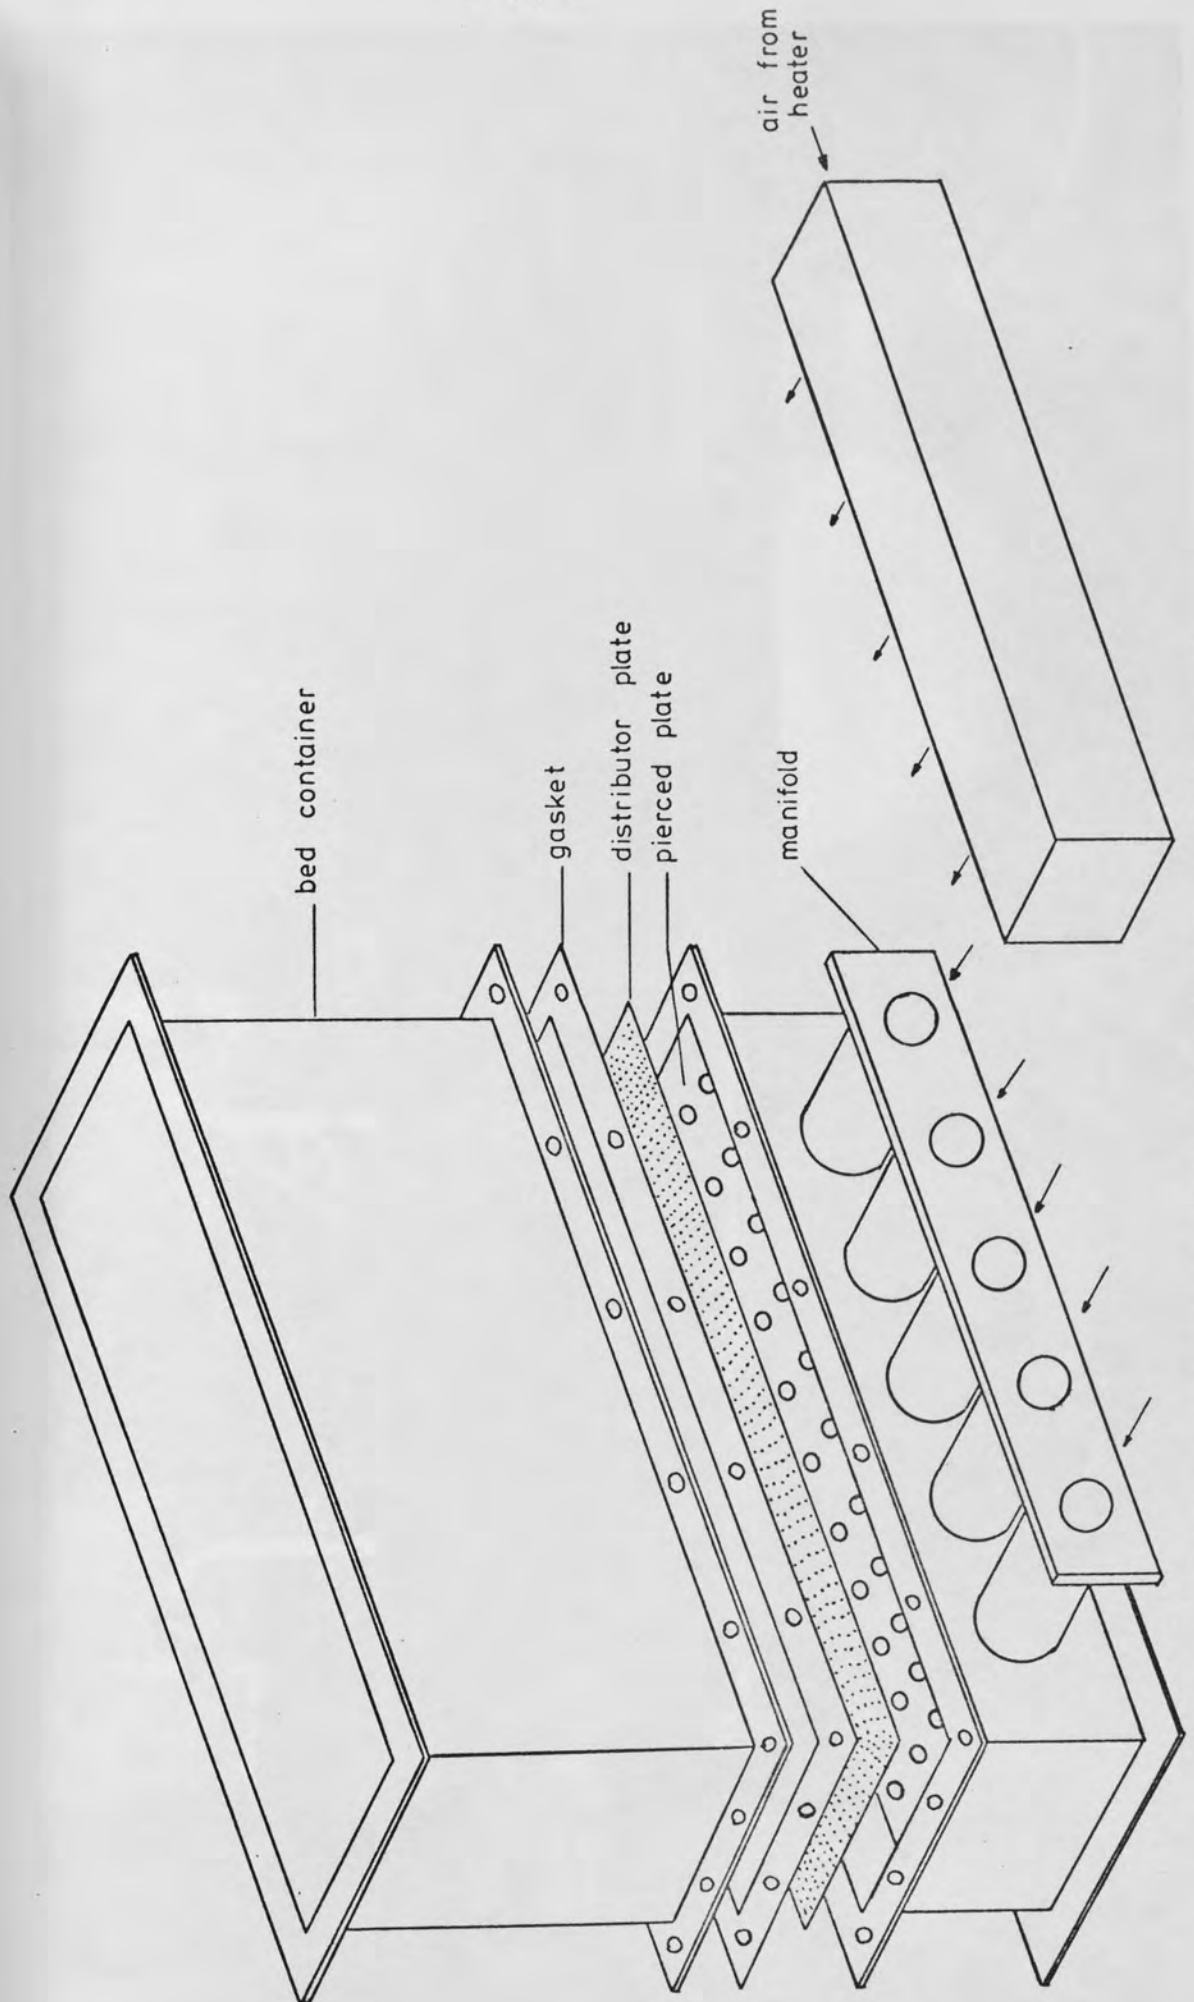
EXPLODED VIEW OF MAIN BED
